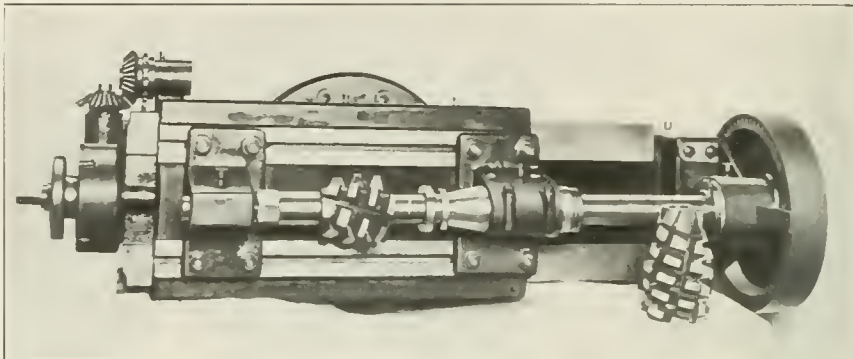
Worm-wheel Hobbing Attachment for Gear-hobbing Machine
